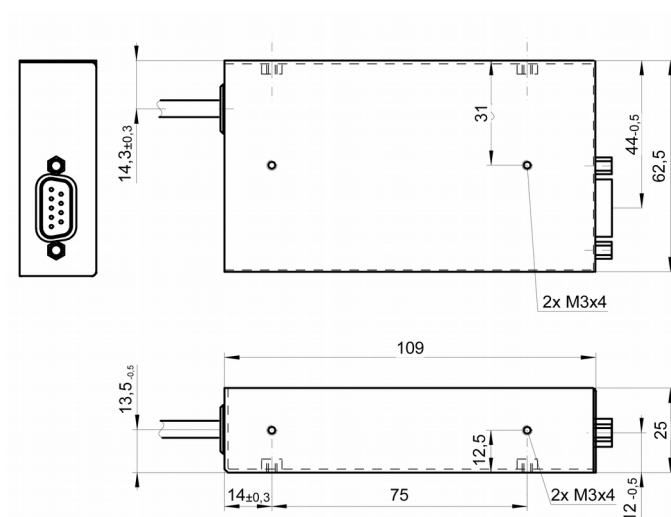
dimensional drawing DPSmini ≤ 6kV / cable
